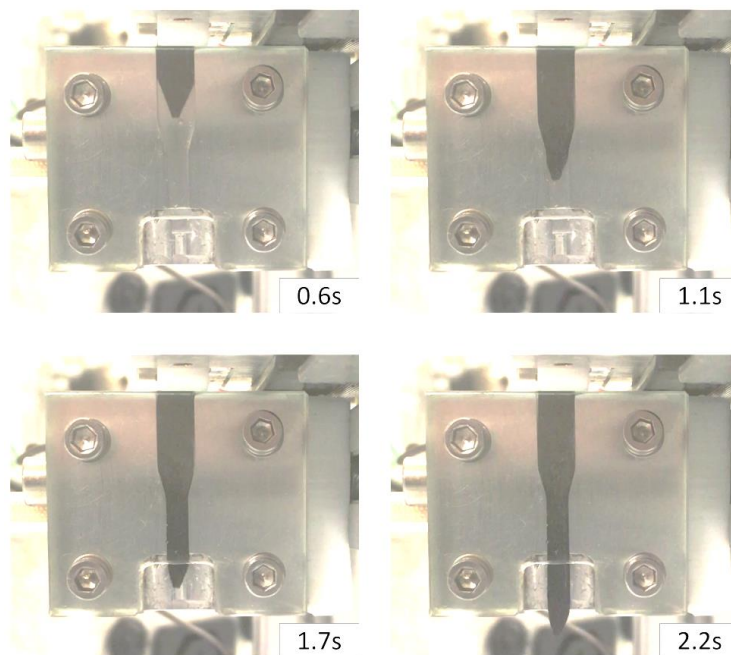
Filament forming with V1 nozzle (3mm outlet) with silicone mould release lubricant.
